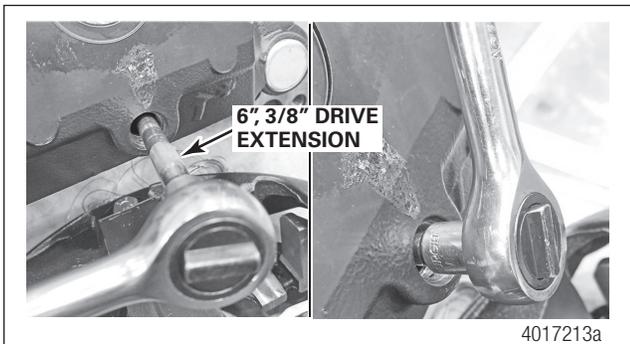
Rotate Adjuster Stem using Wrench with 6" 3/8-Drive Extension
